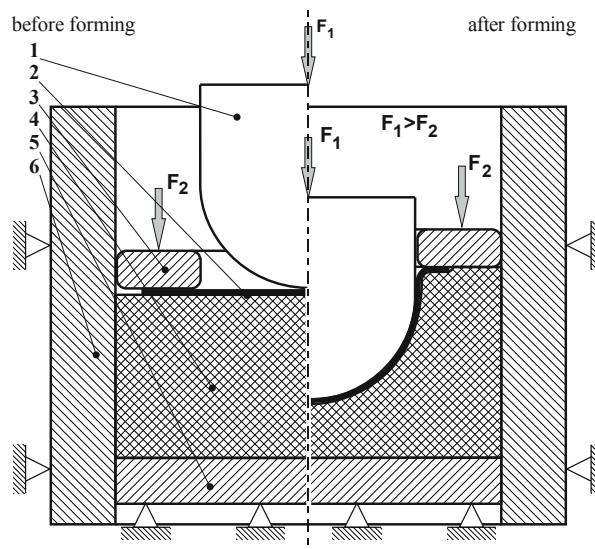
Scheme of the device used for forming of the titanium alloy drawn-parts: 1– punch, 2 – blank, 3 – blank-holder (ring), 4 – elastic material (e.g. rubber), 5 – support plate, 6 – working tube chamber [32,33]
